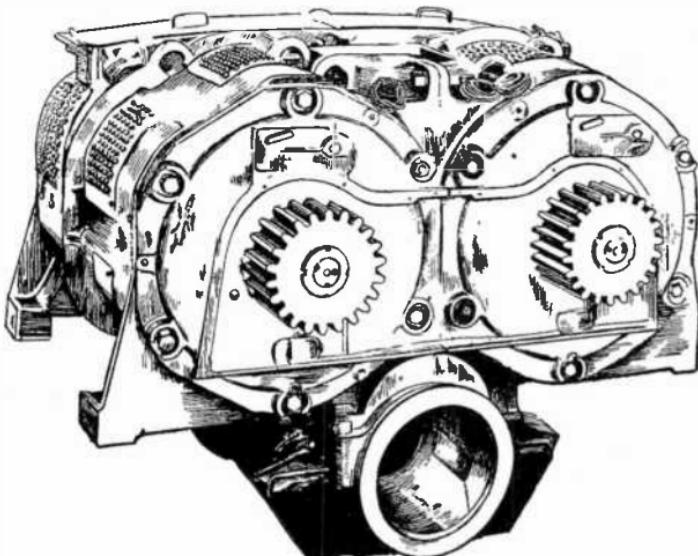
,150.—Westinghouse twin motor used on freight locomotives and high speed passenger locomotives. Note that two motors drive one pair of wheels. The same type motor in a suitable frame is used in multiple unit cars.
